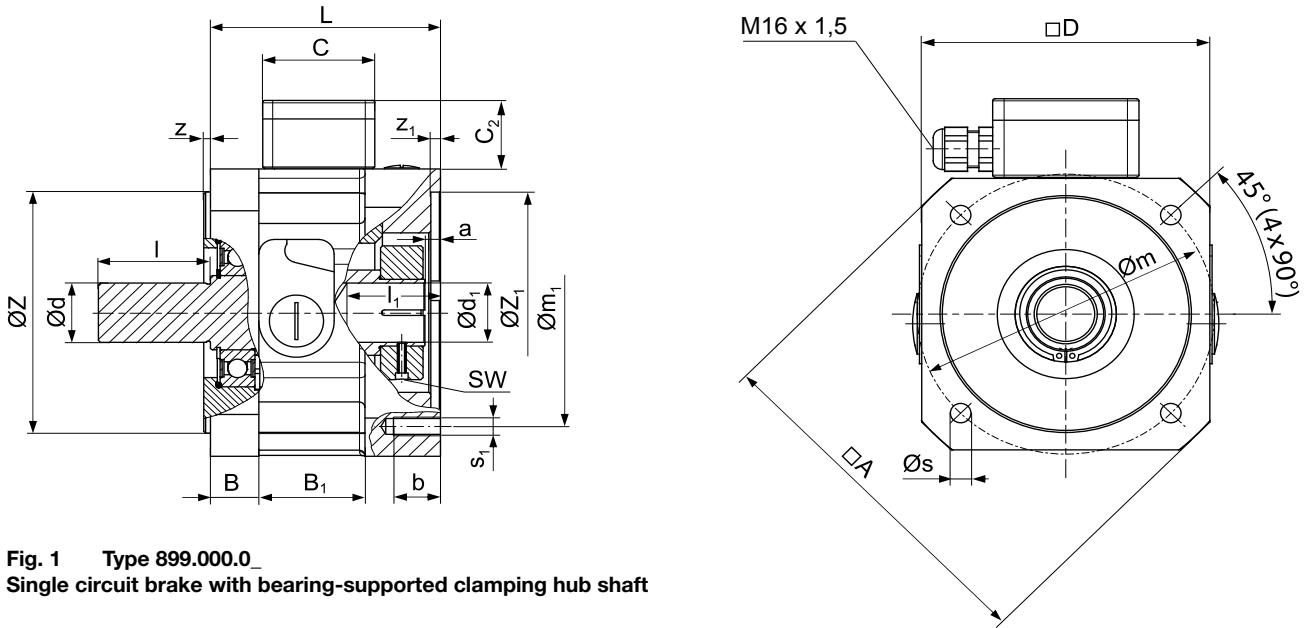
Type 899.000.0_ Single circuit brake with bearing-supported clamping hub shaft
